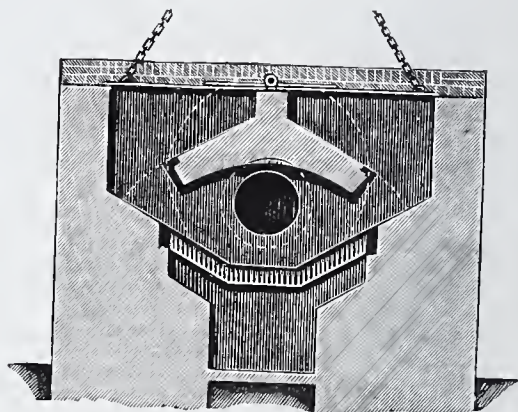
Furnace for Burning Sawdust or Tan for Heating a Cornish Boiler.
